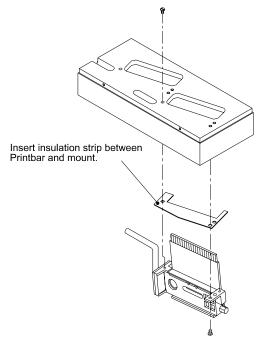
Printhead assembly showing location of the Insulation Strip.
